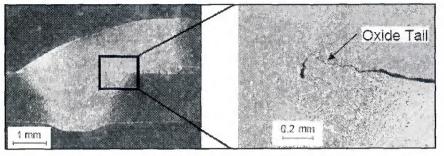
Fillet weld in lap joint with insufficient clamping showing oxide tail defect. Travel speed 1 m/min.
